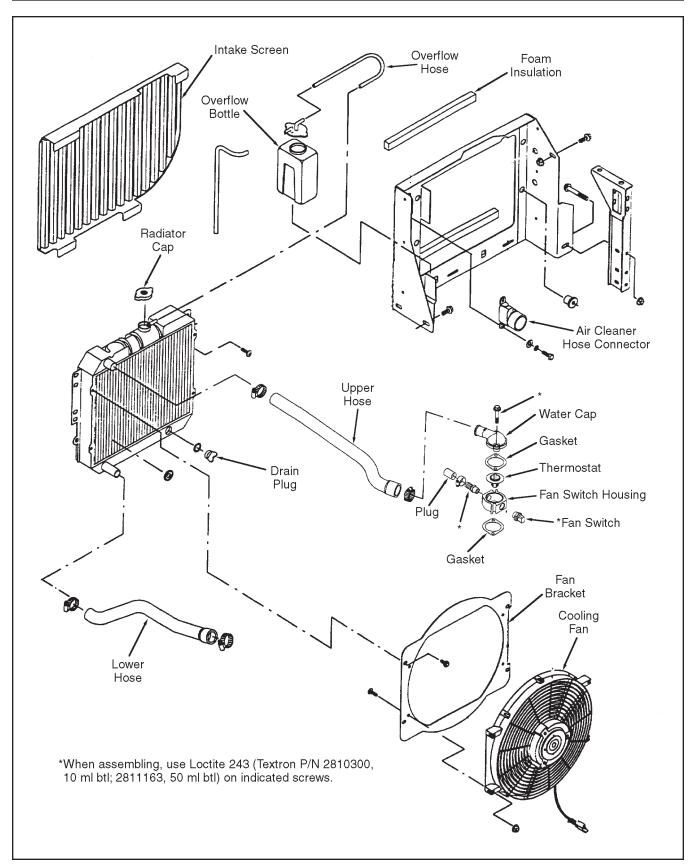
E-5. Radiator and Cooling System — 4-Cylinder Engine (Suzuki 970)
